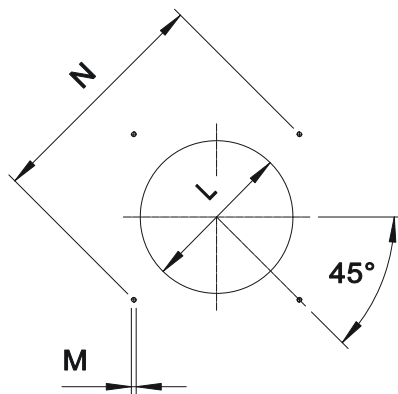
Dimensions GAS XP60/MCE-LX-EVO
